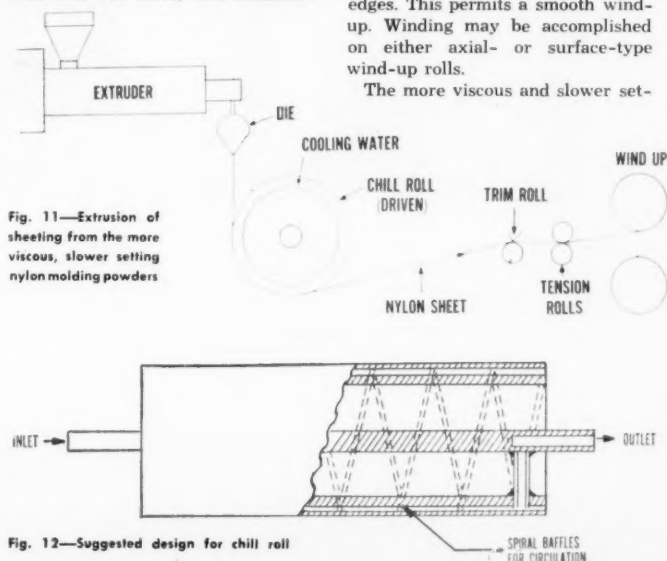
Extrusion of sheeting from the more viscous, slower setting nylon molding powders
